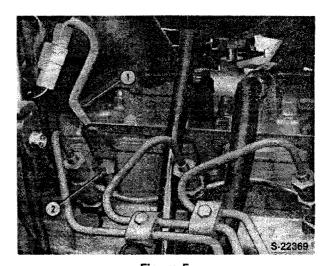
Glow Plug Removal 1. Glow Plug Wire 2. Glow Plug Assembly Connector
